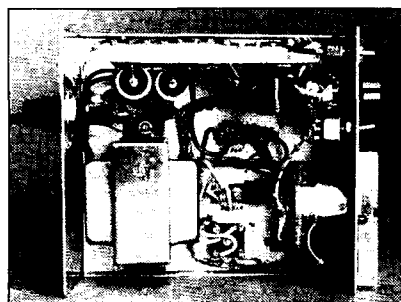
Photo B. Internal wiring; note the position of the LM317, site of the only critical factor in assembly.
